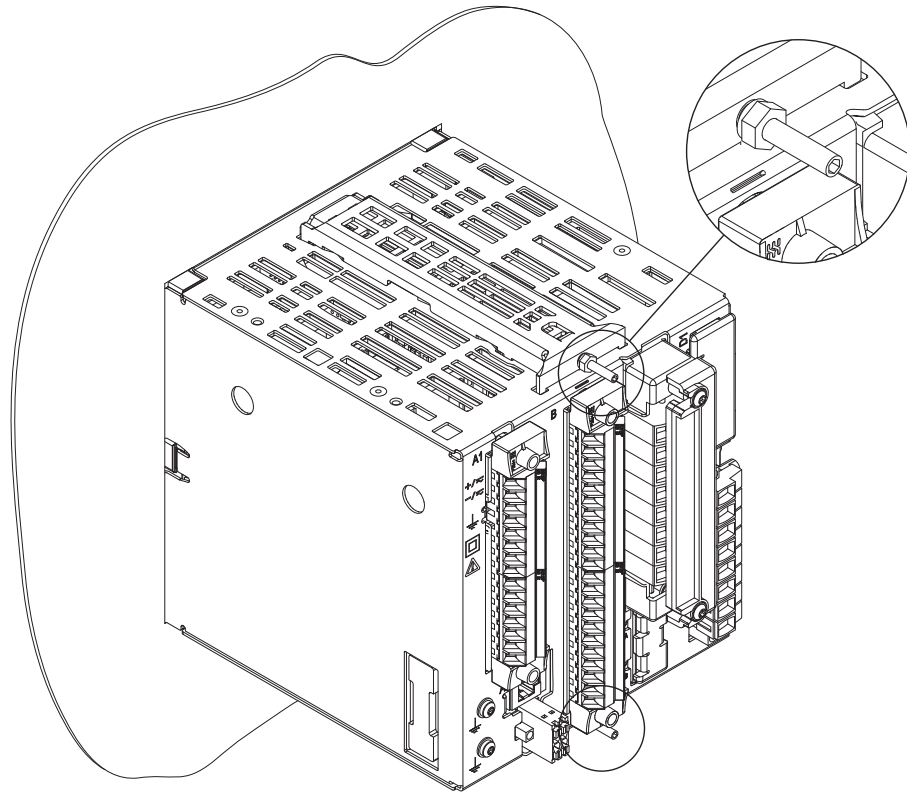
Mounting the fixing clamp assembly together with the relay retrofit adapter set
